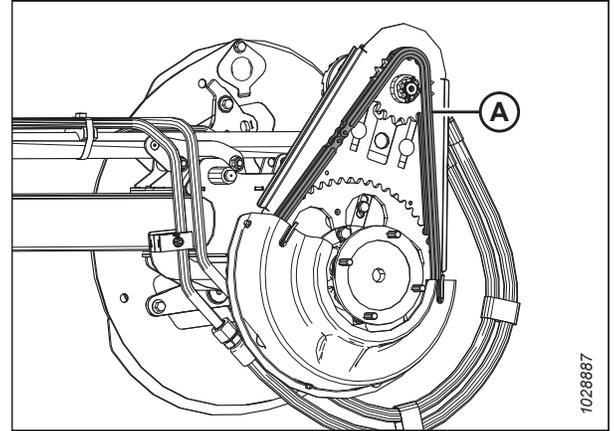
Drive Chain – Double-Reel Drive Shown
